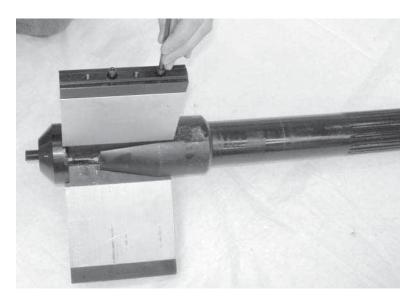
Use the steel extension legs (#1 or #2) on top when installing multiple legs.
